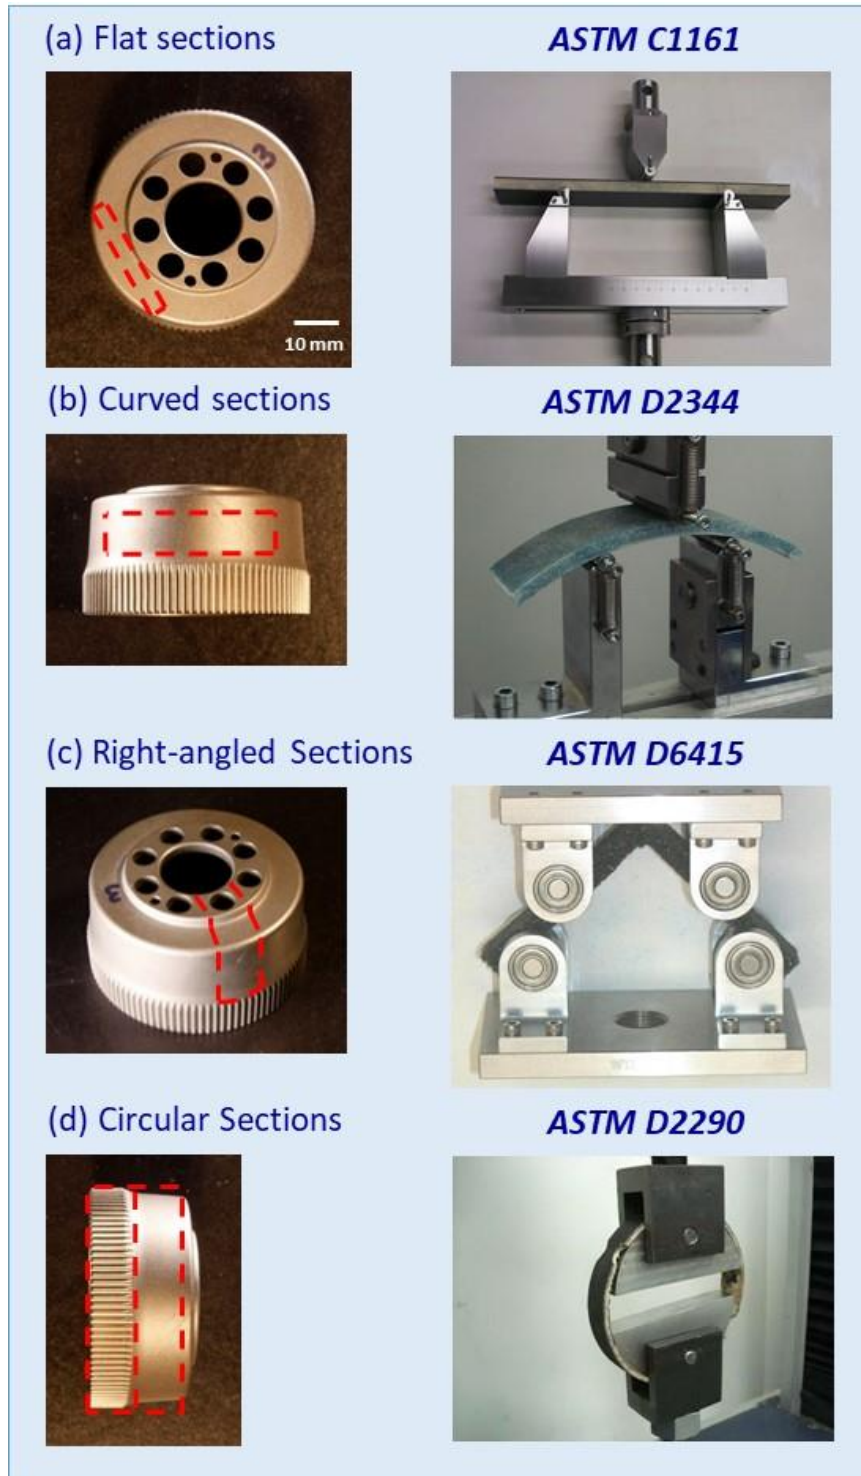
Screen testing of flexspline gears: (a), flat sections, using 3-point bend tests [ref. 47]; (b), curved sections, using 3-point bend tests [ref. 57]; (c), right-angled sections, using 4-point bend tests [ref. 57]; (d), circular sections, using split-disk tests [ref. 58].
